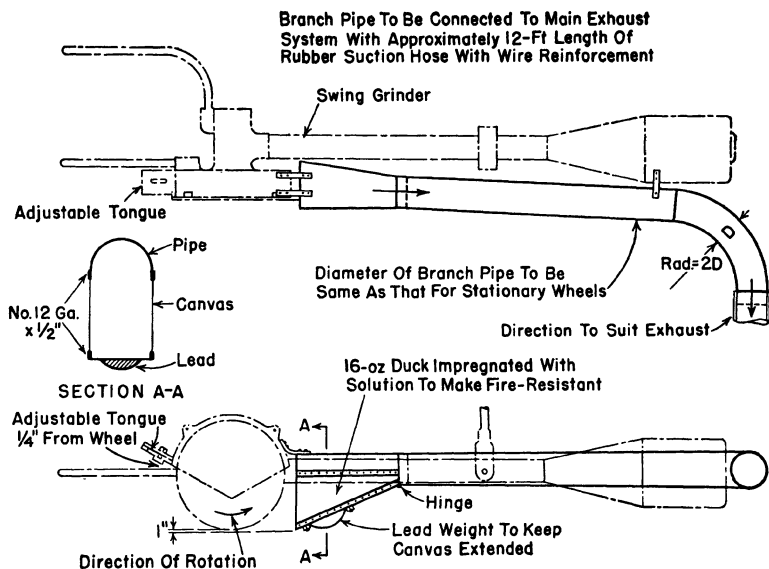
Local Exhaust at a Swing-Frame Grinder (Courtesy AFA)
